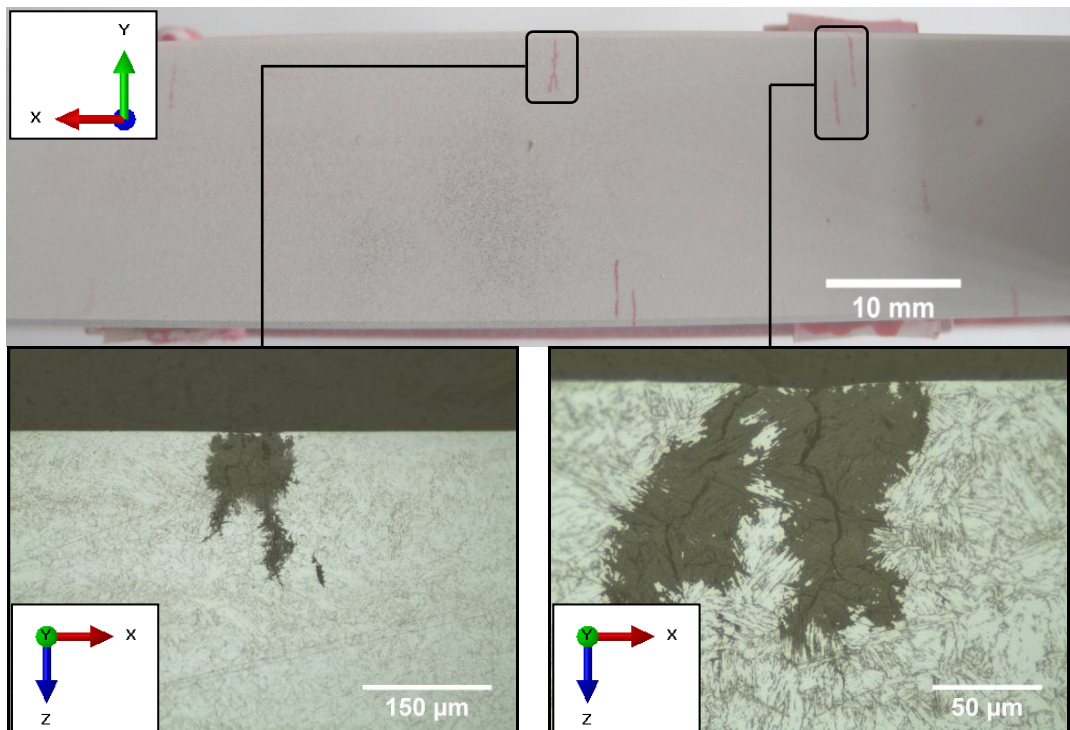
SSC cracks located on the tensile surface of fully-machined specimen P4 (Specimen tested in Produced Water at 24 °C and exposed to 69 mbar H₂S). The majority of cracks are either at the inner loading roller position or at the edges of the specimen
